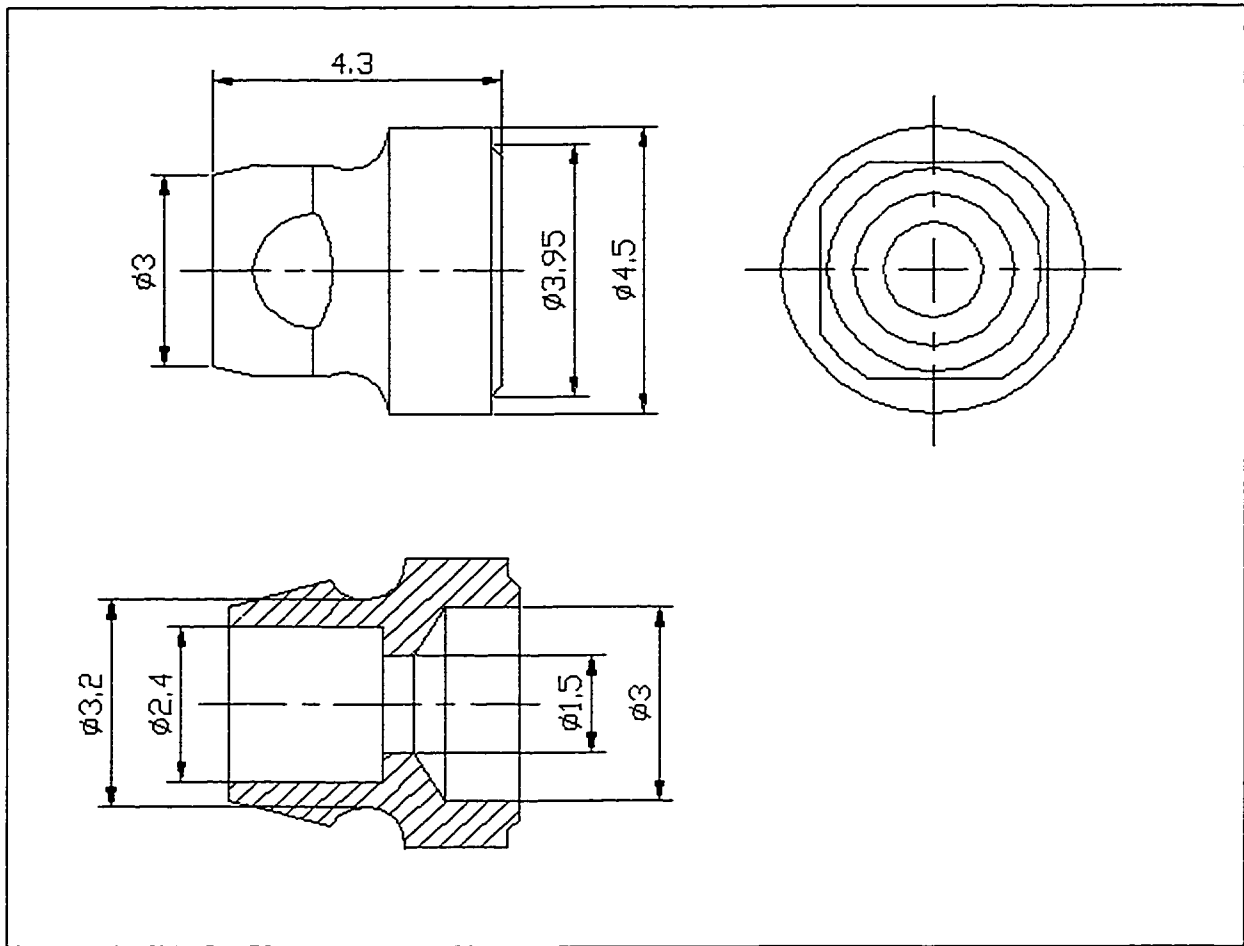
Nobel Biocare 4mm Gold Cylinder (All dimensions in mm)
